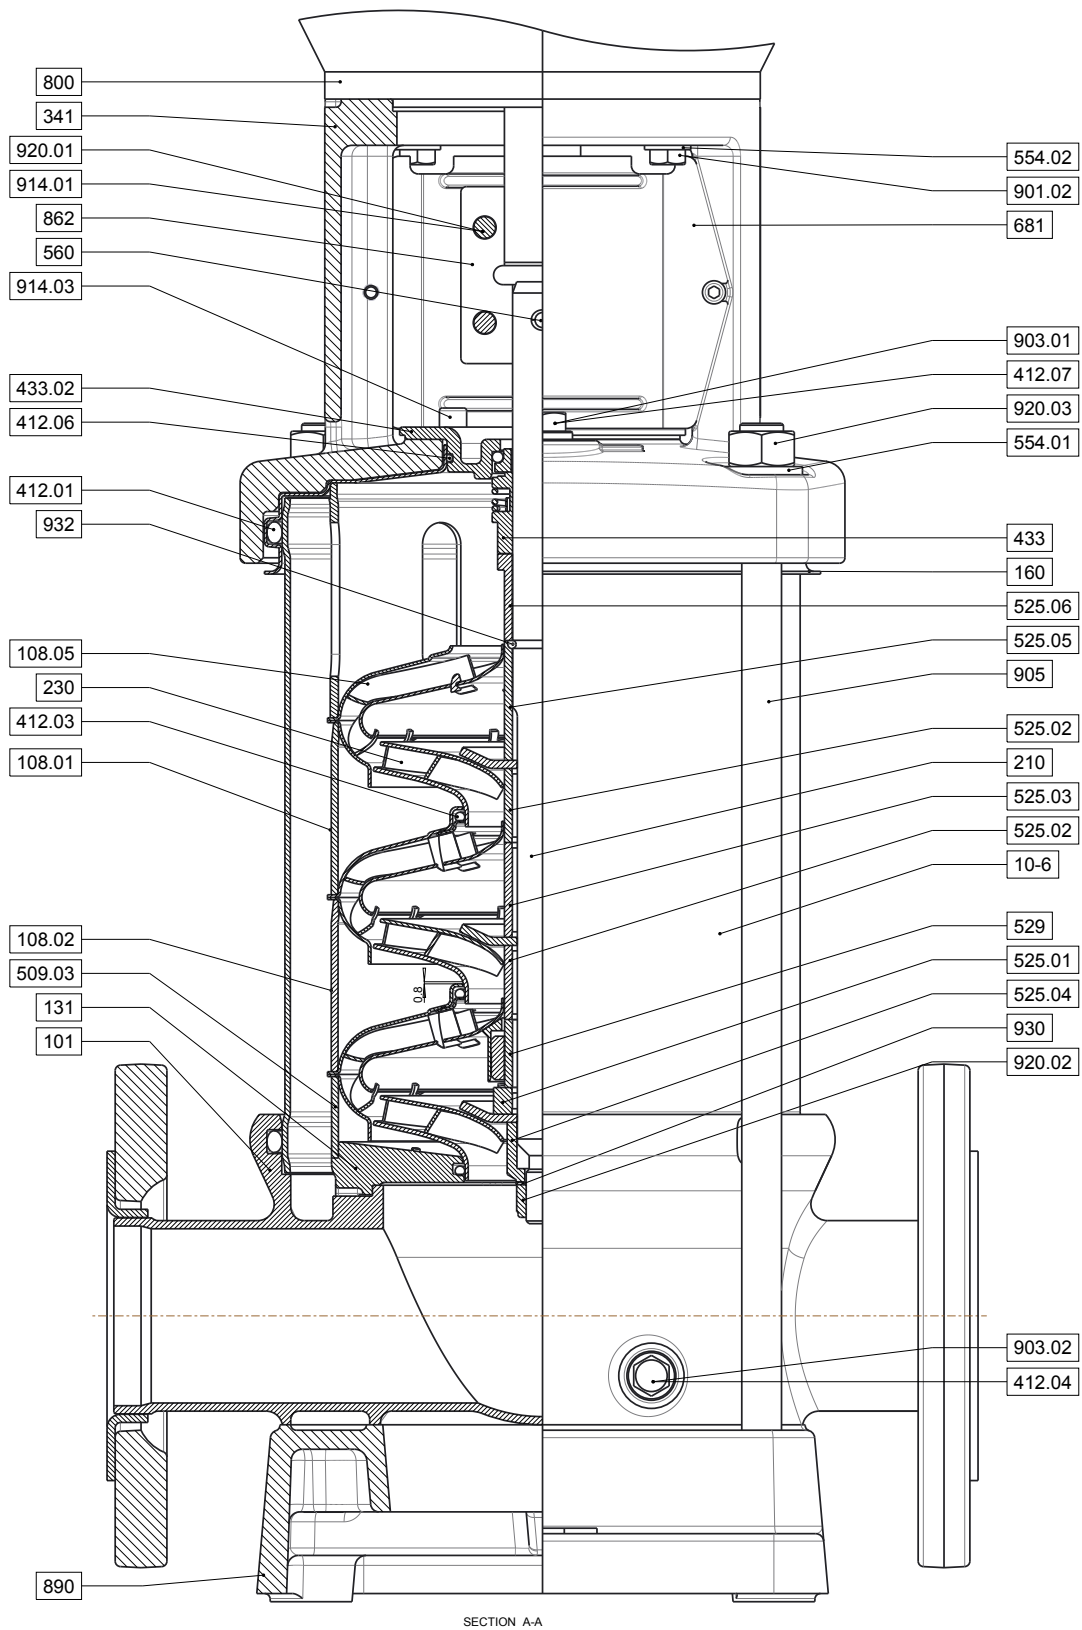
Sectional drawing DPVF(S) 25, 40, 60 B
